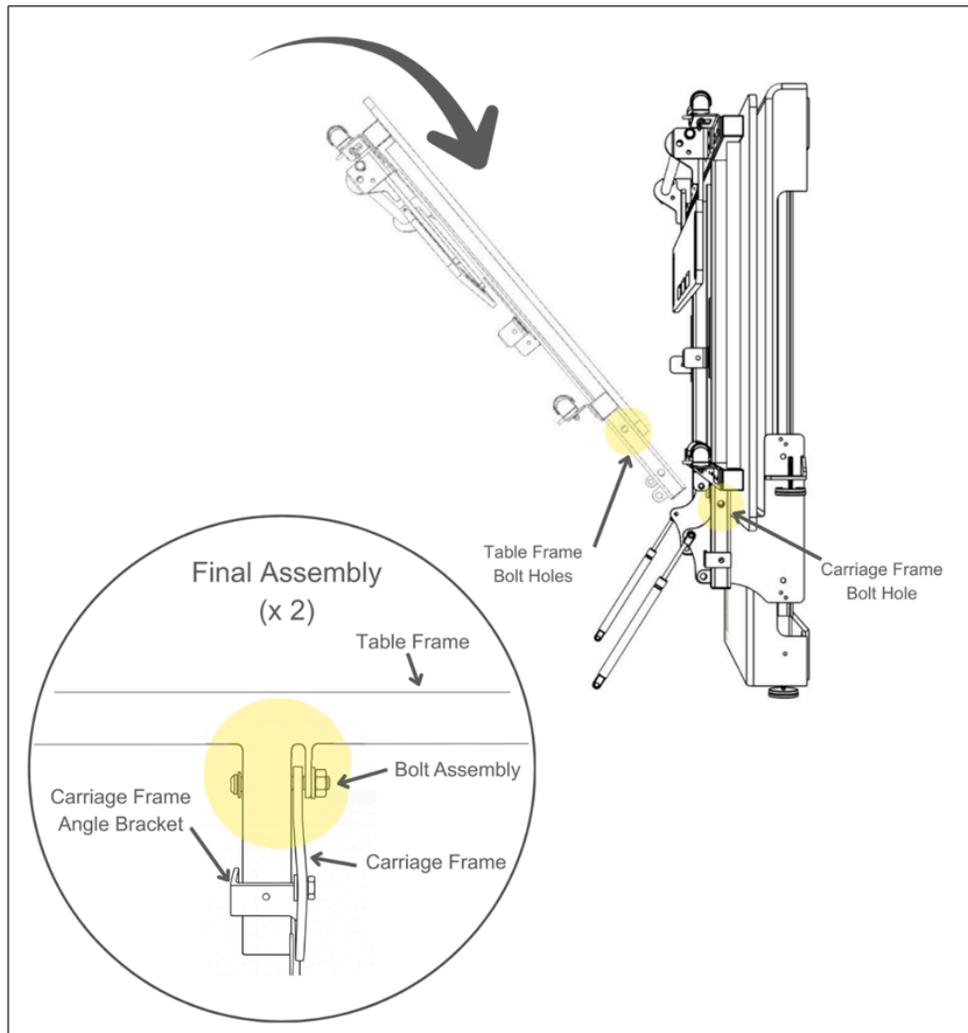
Table Assembly Installation with Bolt Hole Alignment Locations
